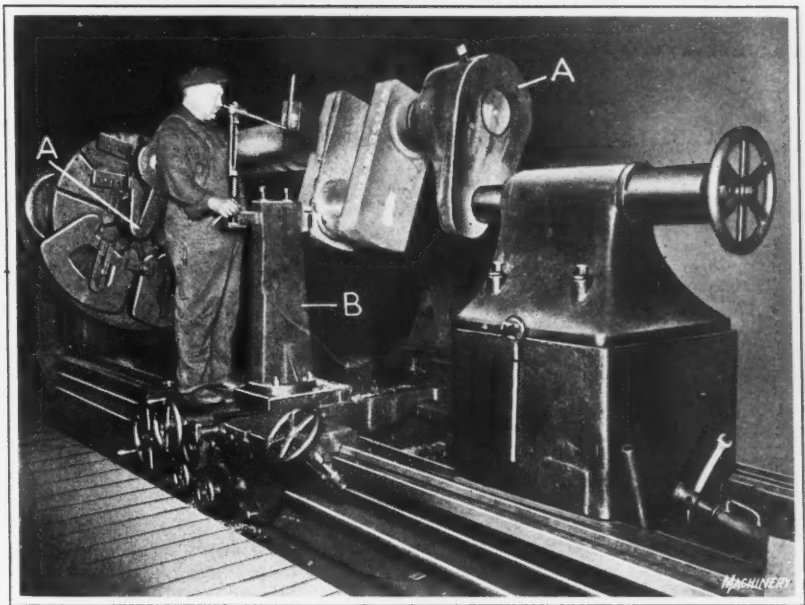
Turning the Crankpins of a Single-throw Crankshaft
